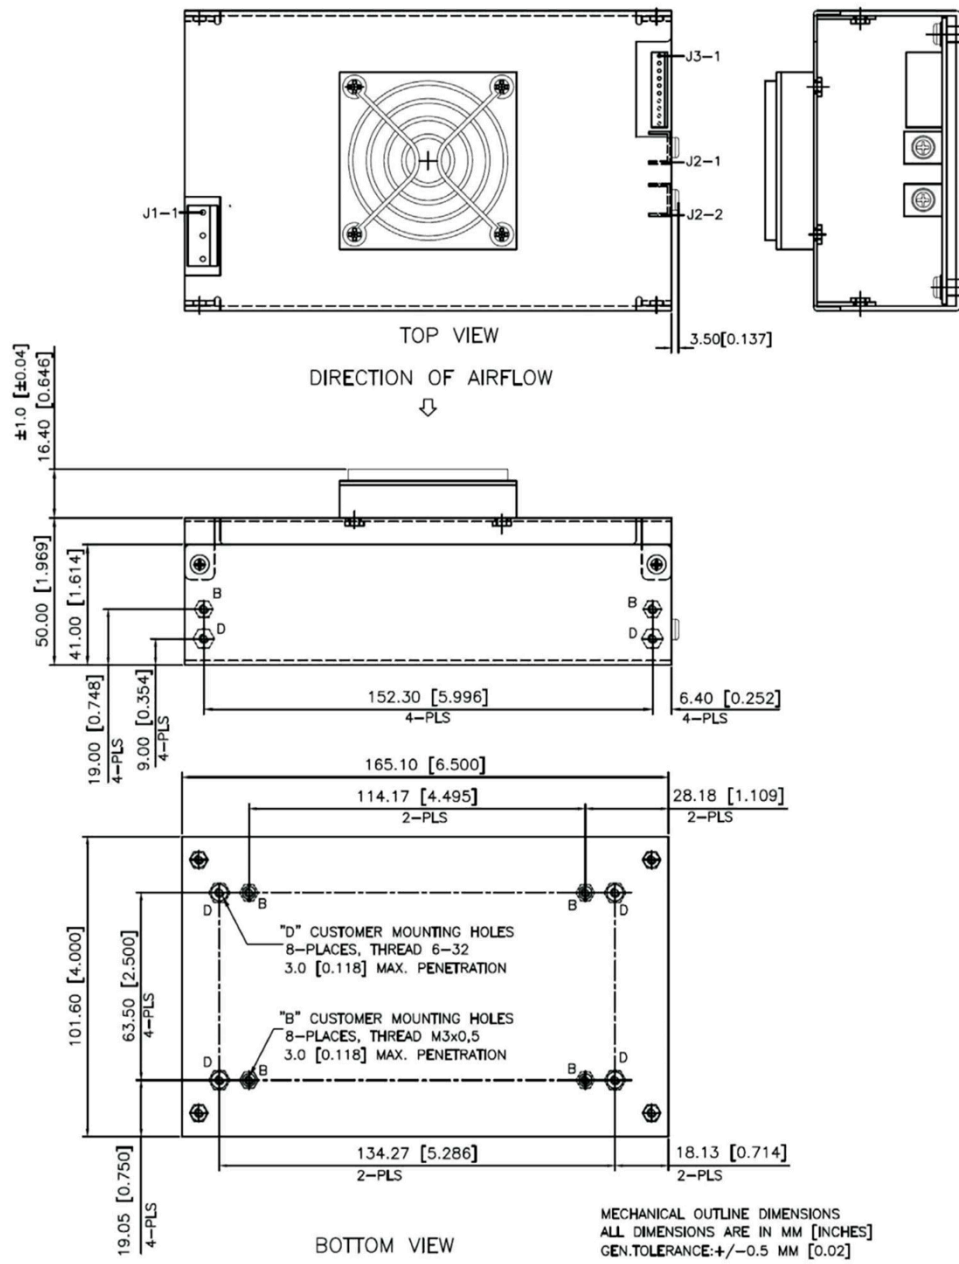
Mechanical Drawing (With Top Fan Mounting)
